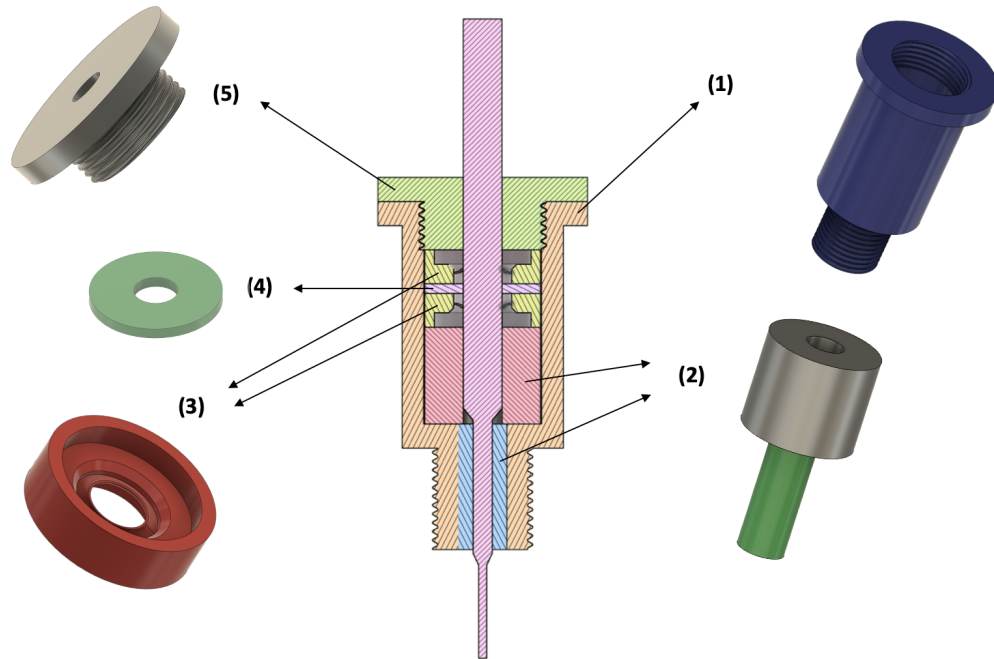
Exploded sectional view of the sealing assembly integrated into the process connection.
